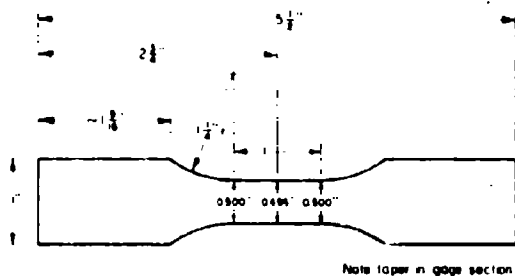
UNNOTCHED SHEET FATIGUE SPECIMEN
